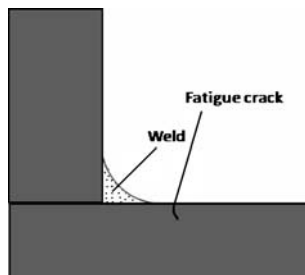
A steel I-beam, where the components have been joined by welding
